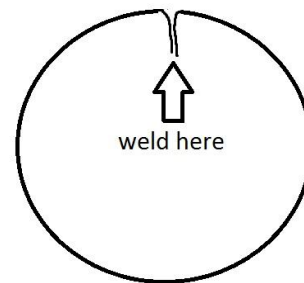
Scheme of the tube vent, the weld-able side of the foil is outside
